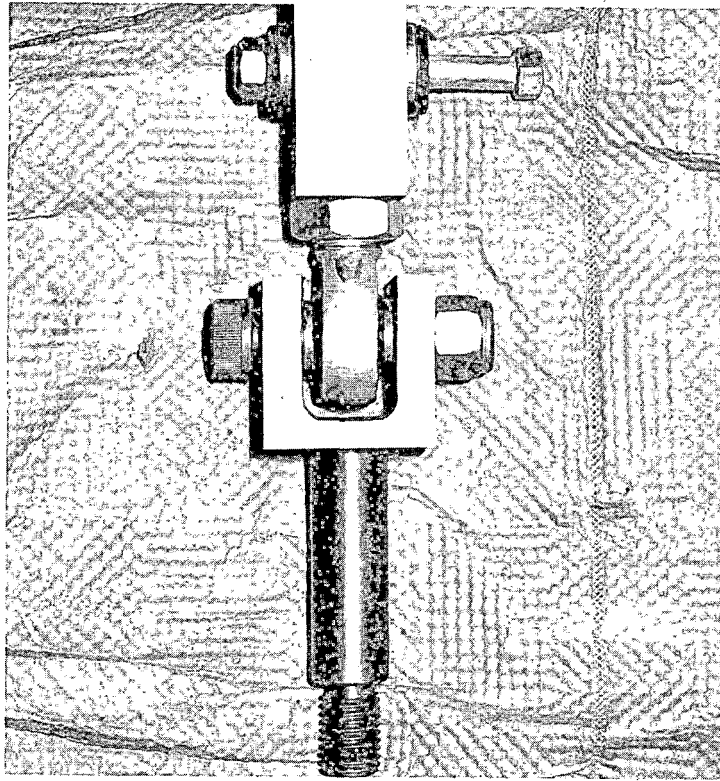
NEW DISC BRAKE FORK BOLT ASSEMBLY.
